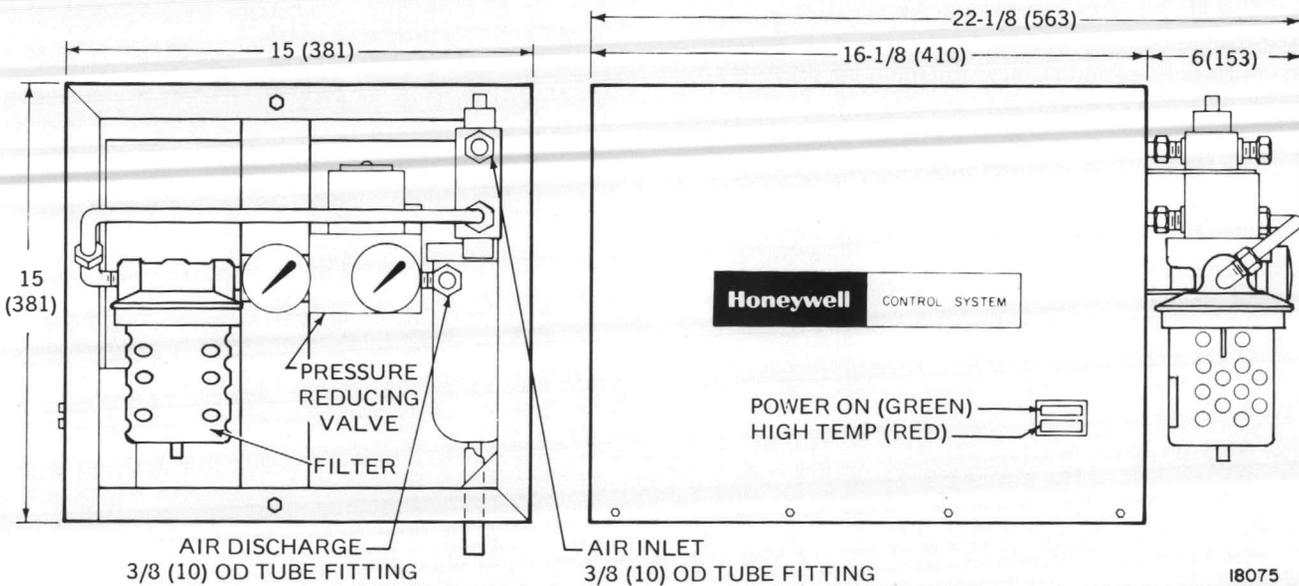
HKN8210 Dimensions in Inches (Millimeters).
